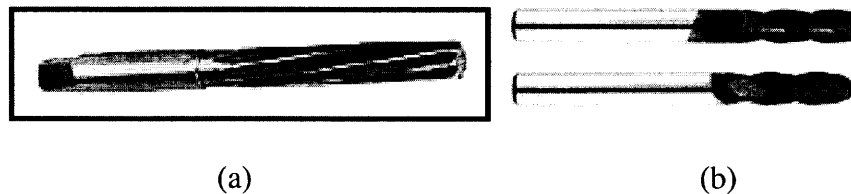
Tools, which are used in (a) NASA II milling machine, (b) drilling operation.
